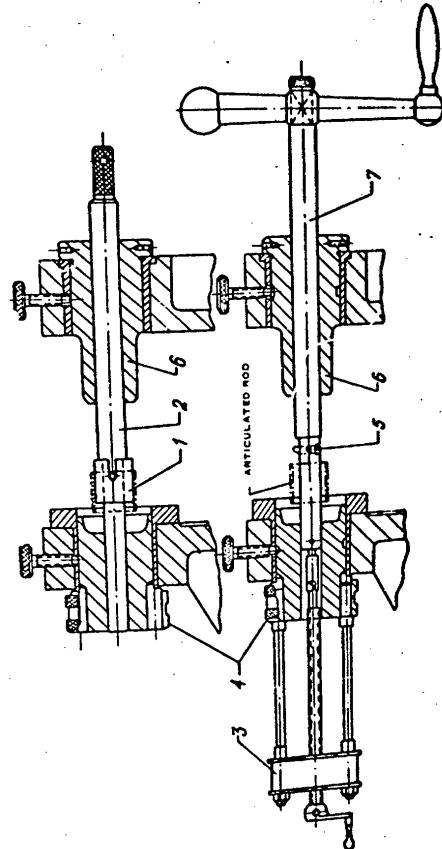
CENTERING AND BORING PISTON END BUSHING
